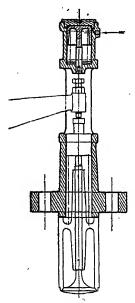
Mechanism for lifting Valve Actuating Levers during reversal (Kolomna).
